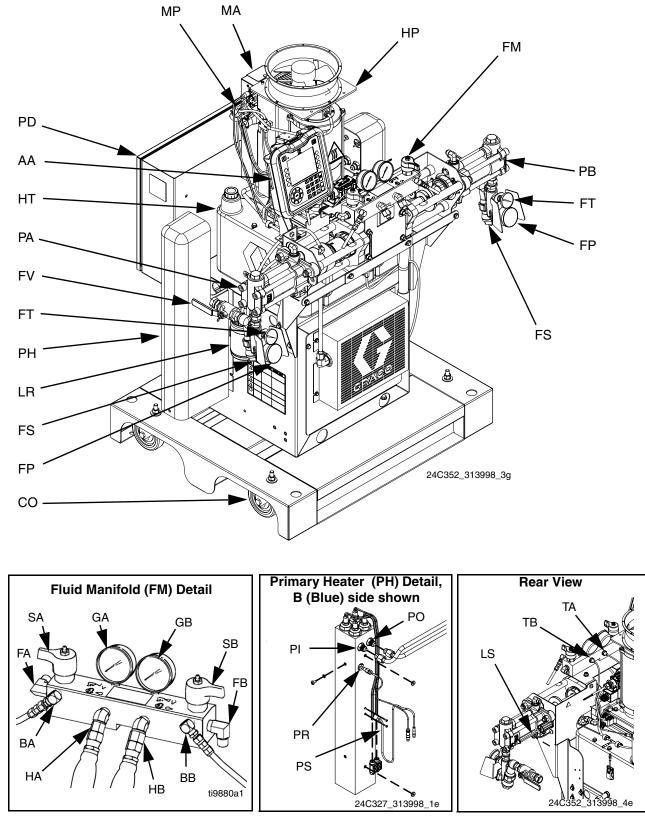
Component Identification, Heated Model shown with shrouds removed
